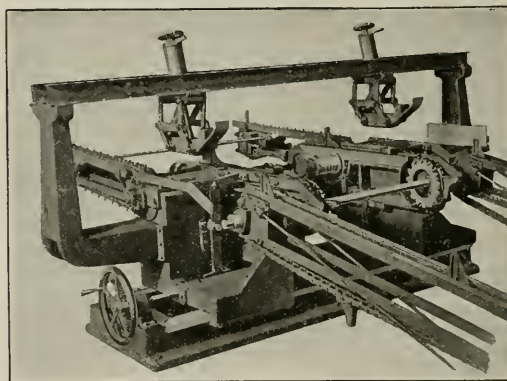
AUTOMATIC TIE-ADZING MACHINE
